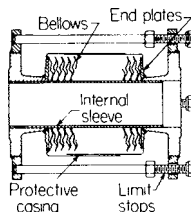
Expansion joint for steam line. (Croll-Reynolds, Inc.)
